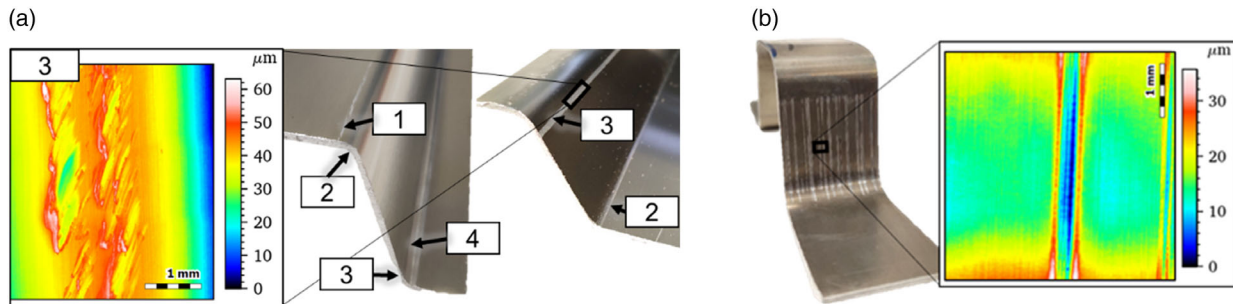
a) Surface quality measurement of the roll formed part and b) the stamped part for the example of the O-process route.
